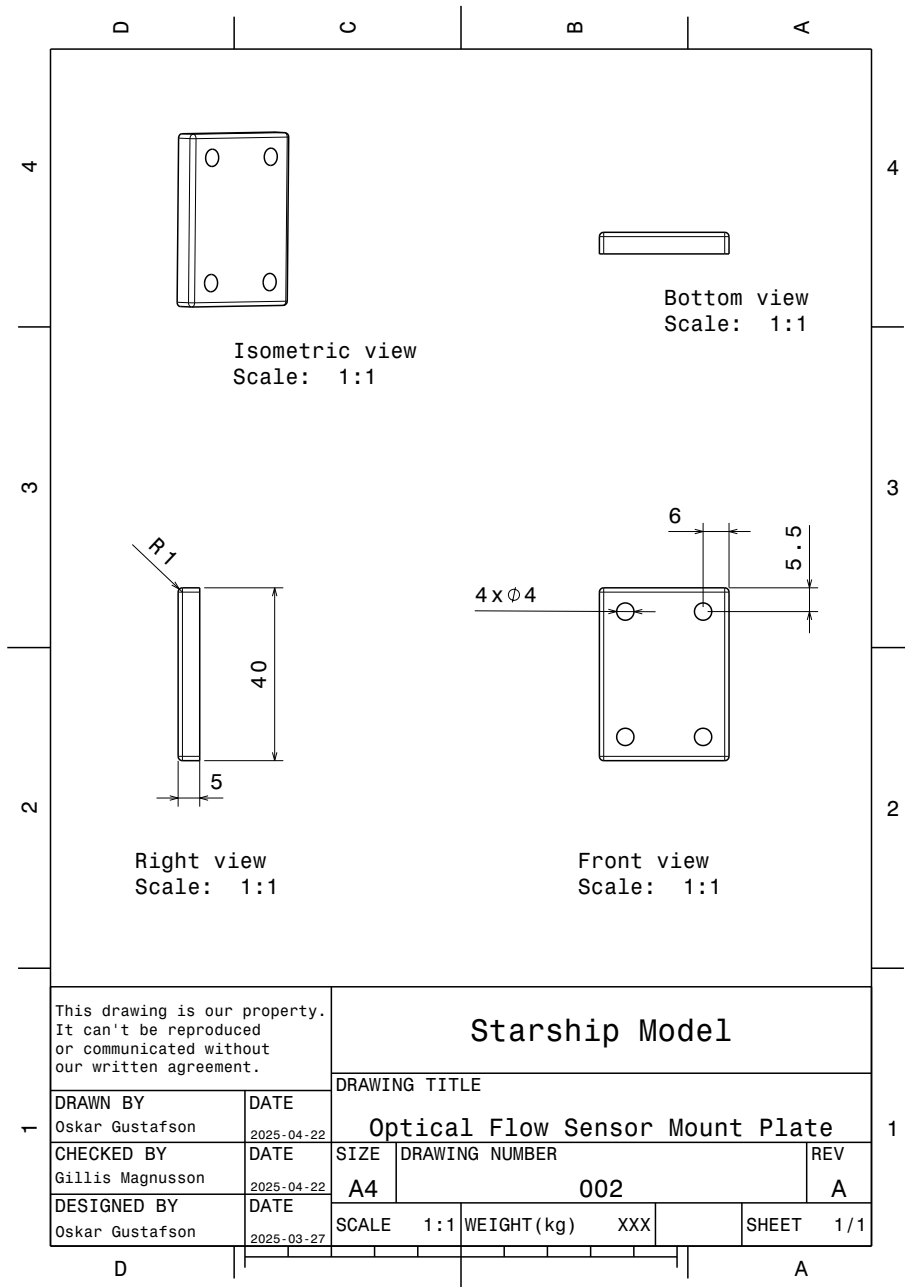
Drawing of the back plate of the optical flow sensor mount.
